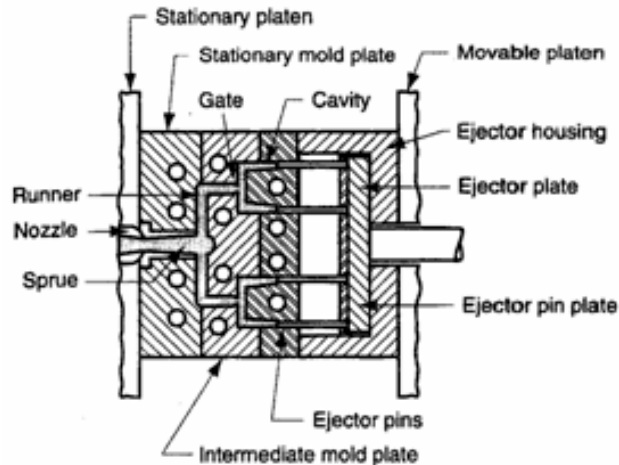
Schematic of a mold for injection molding.¹⁰⁸
